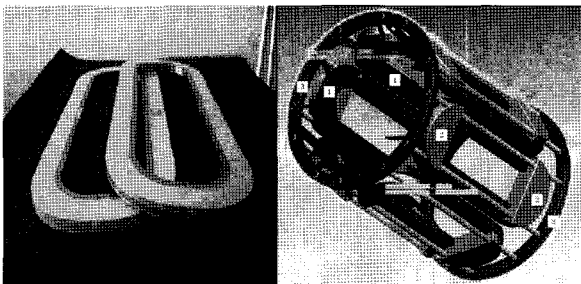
Photo of two pancake windings and the construction of the motor stator.
